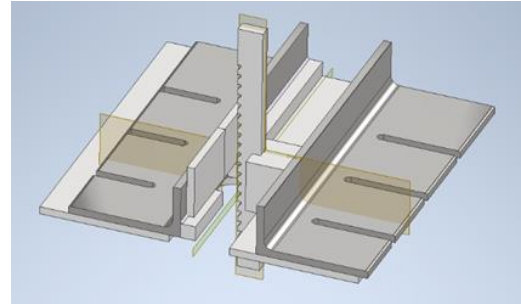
The device for realising the innovative post-weld finishing method [18]
